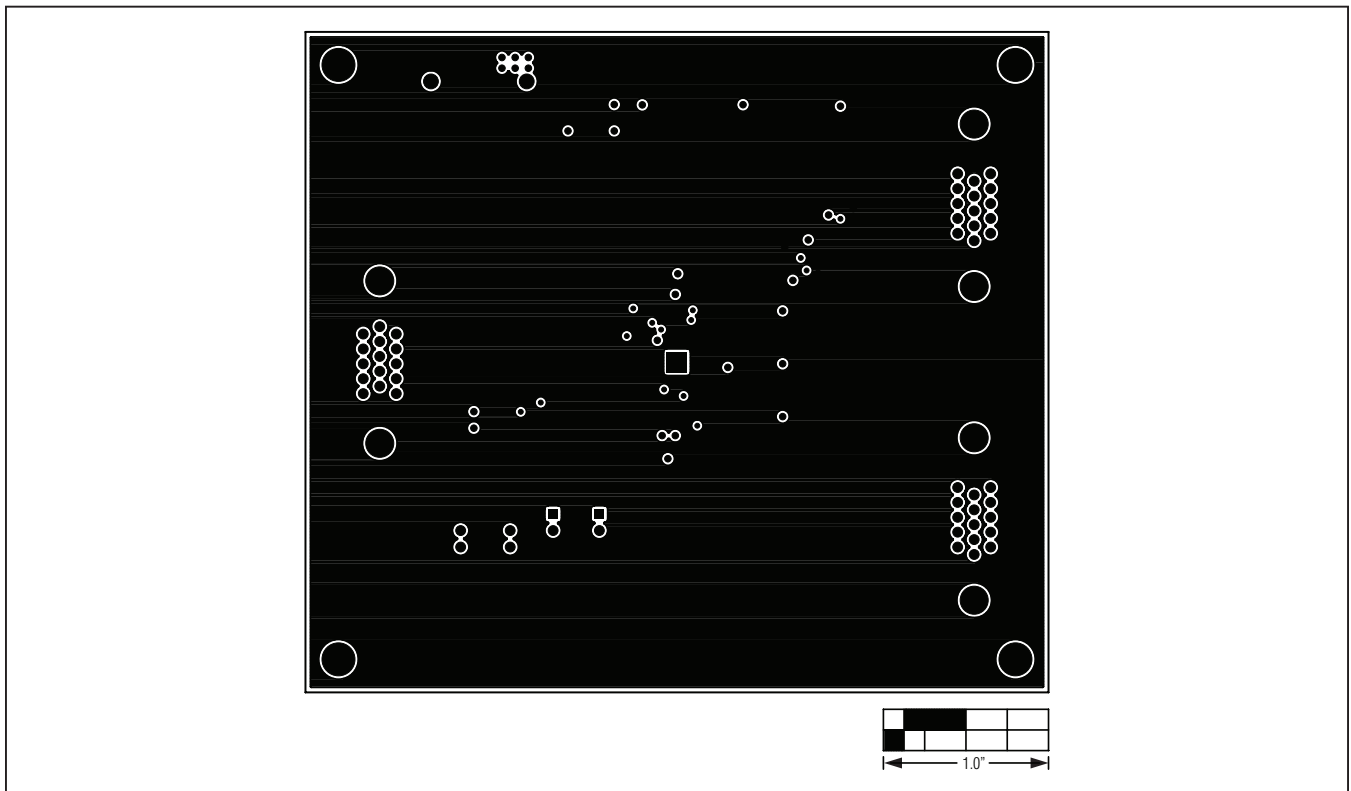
MAX14983E EV Kit PCB Layout—GND Layer 3
